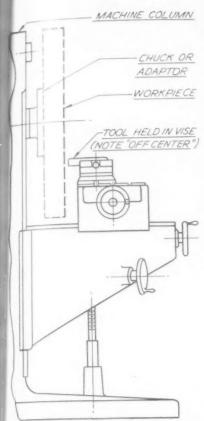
Turning a wheel on a milling machine. Workpiece is swung between column and saddle. The tool is clamped in a vise, secured to the table.
